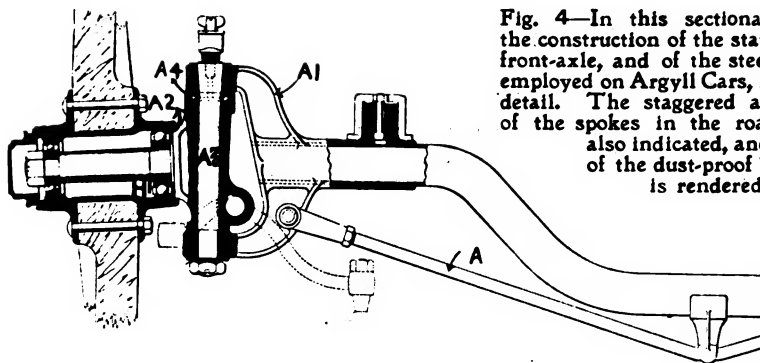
In this sectional drawing, the construction of the stayed, tubular front-axle, and of the steering-heads, employed on Argyll Cars, is shown in detail. The staggered arrangement of the spokes in the road-wheel is also indicated, and the design of the dust-proof ball-bearing is rendered clear.
